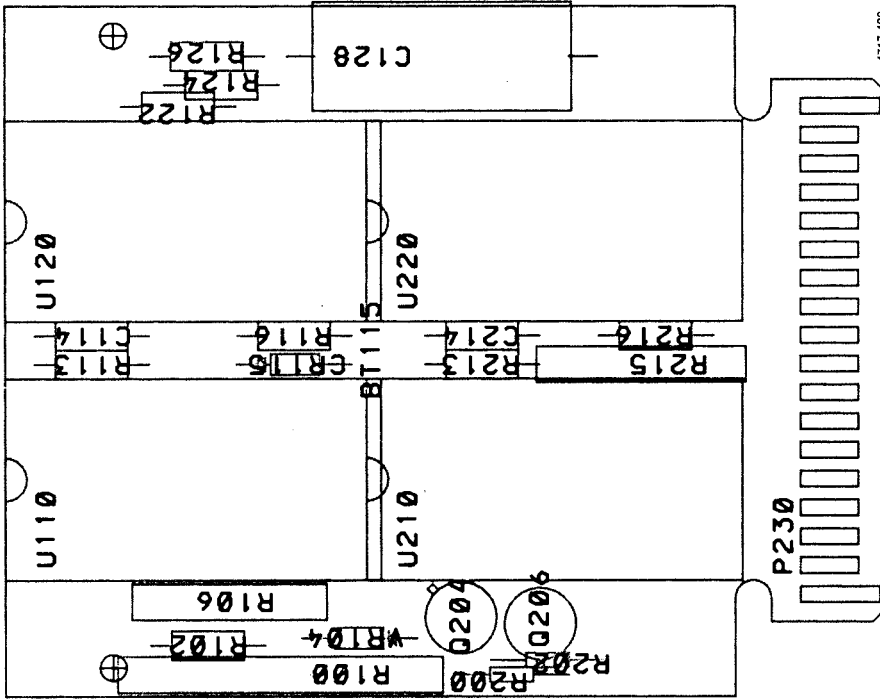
A41 8K RAM Pack Board Component Locations
